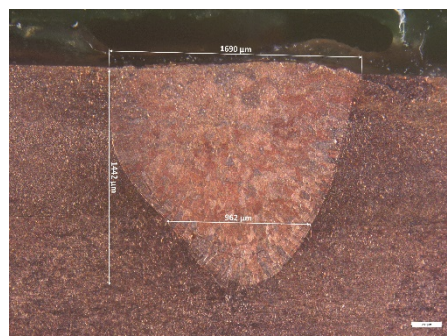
Cross-section view on 1 mm copper welded on 2 mm copper, resulting in approx. 1 mm joining width.
